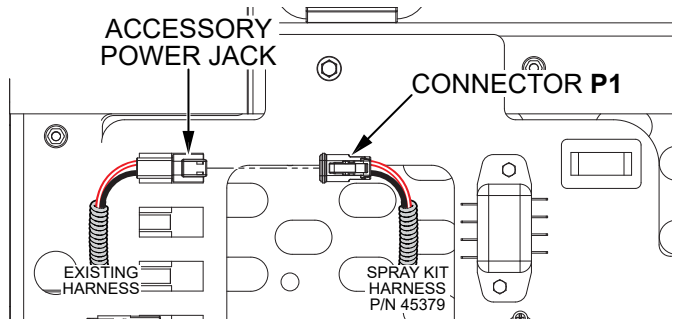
Connect Spray Kit Harness to Accessory Power Jack
